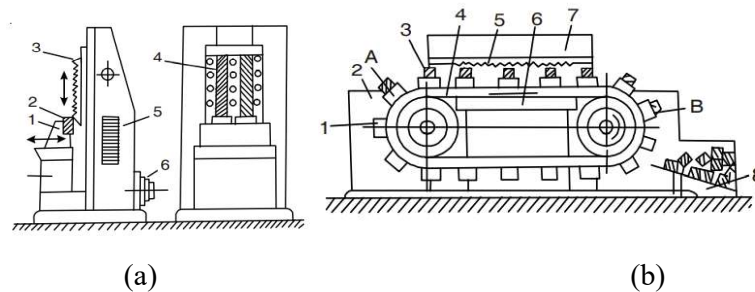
(a) Vertical Surface broaching (b) Continuous Surface broaching [6]
